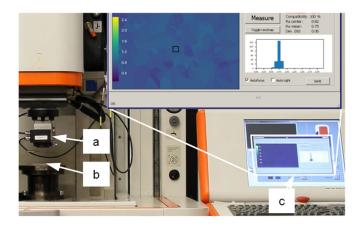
Sinking EDM machine with imaging sensor (a), the workpiece (b), and integrated GUI (c), for Al-based roughness analysis, based on [69].
